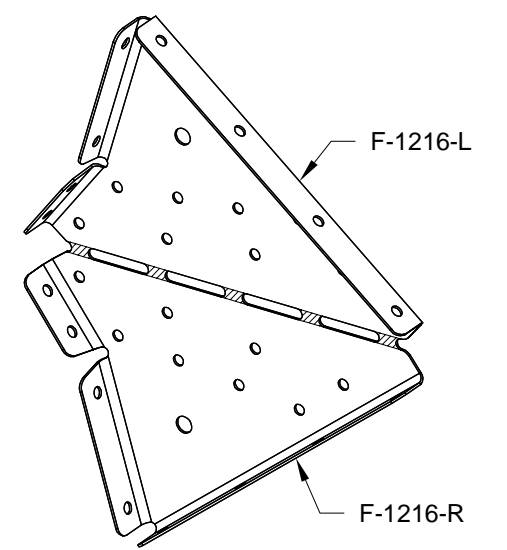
SEPARATE F-1216 SEAT BELT ATTACH LUG SUPPORT
